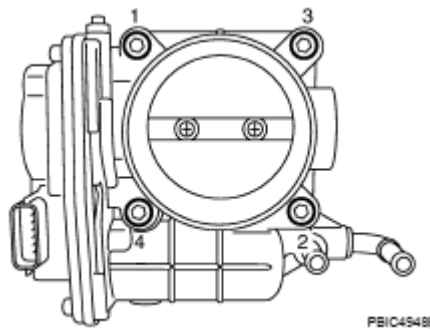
Identifying Electric Throttle Control Actuator Mounting Bolts
